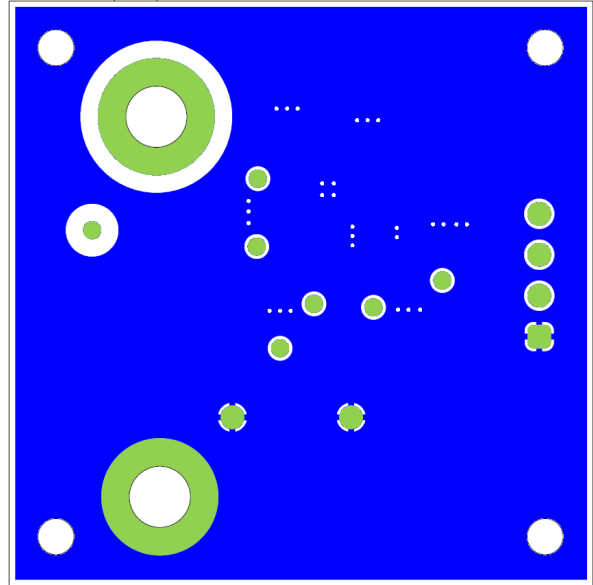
FAD1101AEVB PCB Bottom Composite Drawing (bottom view)
